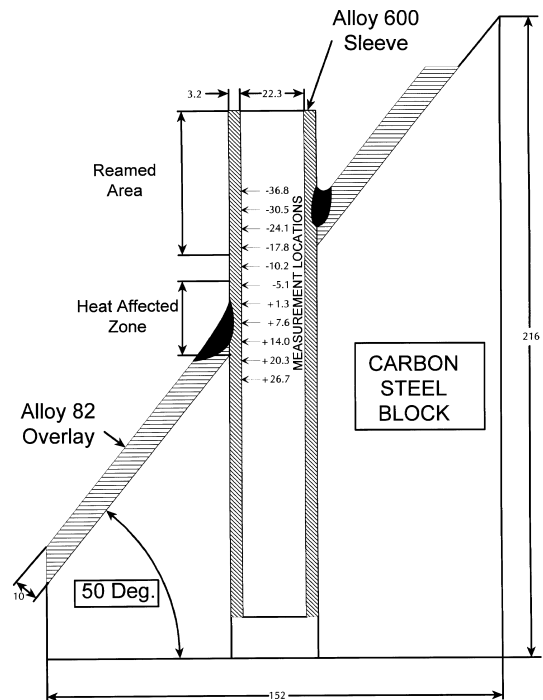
Alloy 600 50-deg. heater sleeve penetration J-weld mockup specimen geometry
